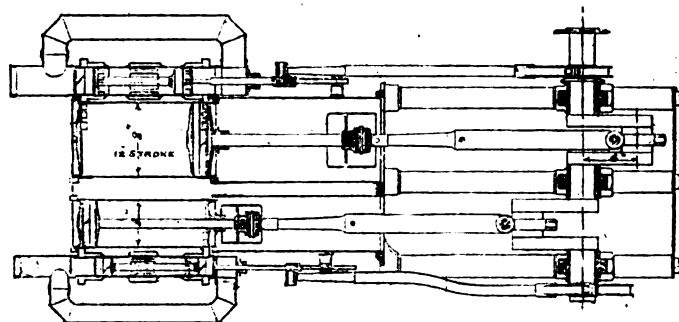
HORIZONTAL SECTION OF MAXIM ENGINE.
